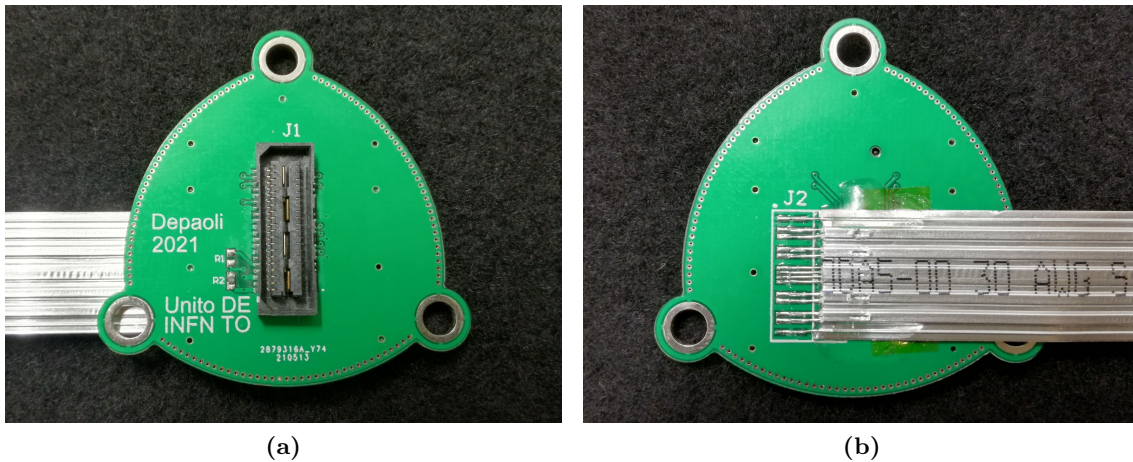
Pictures of the PCB connecting the Pixel Main Board to the Slow Control Board
